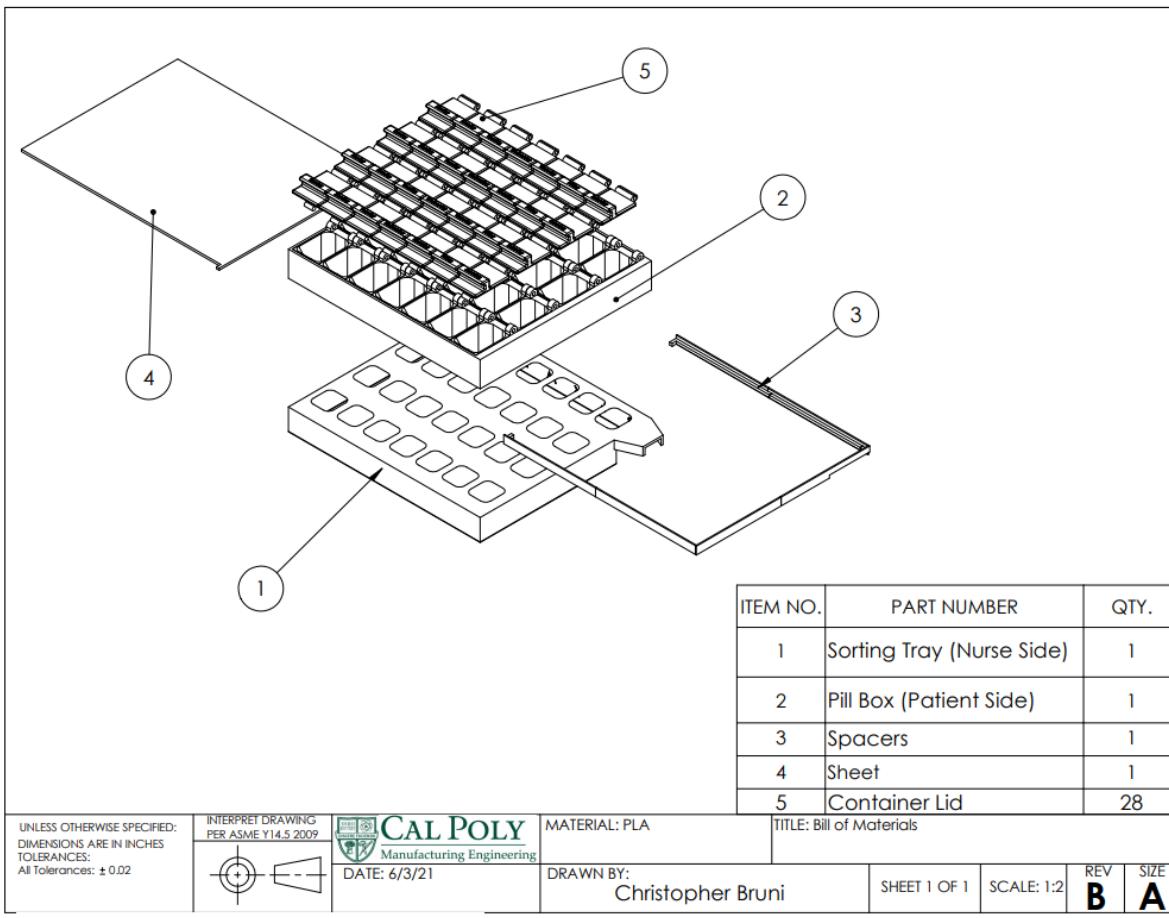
Exploded Assembly Drawing and Bill of Materials.
